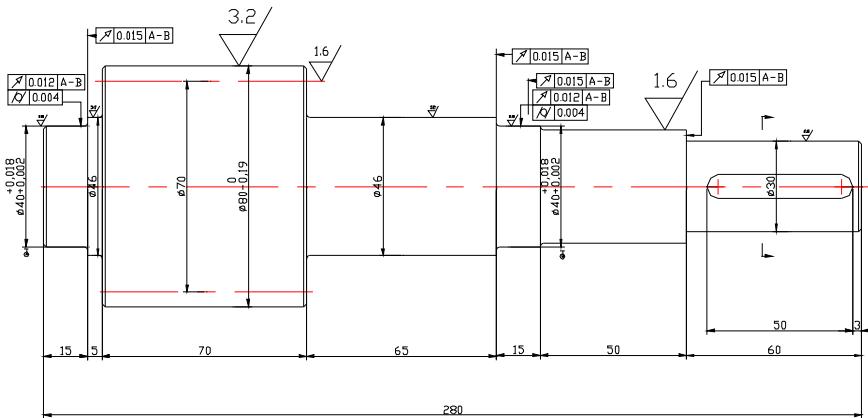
The drive shaft parts drawing of the low-level reducer gear
